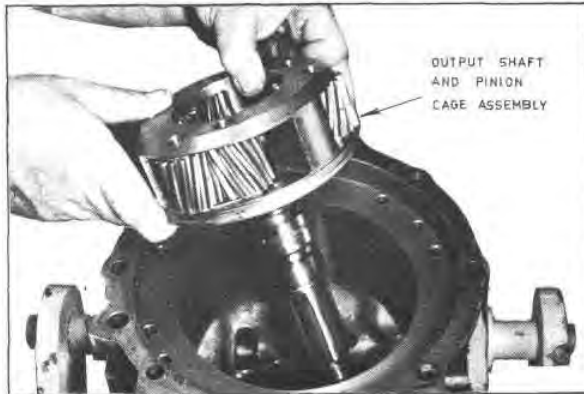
Removing the Pinion Cage and Output Shaft Assembly
